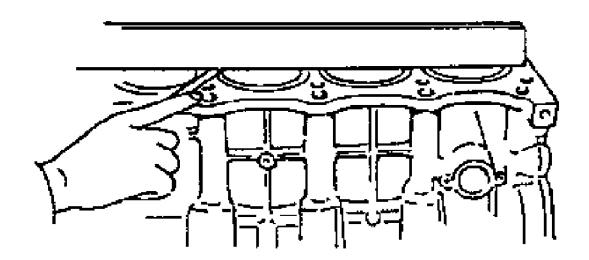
Checking Cylinder Block Courtesy of SUZUKI OF AMERICA CORP.
